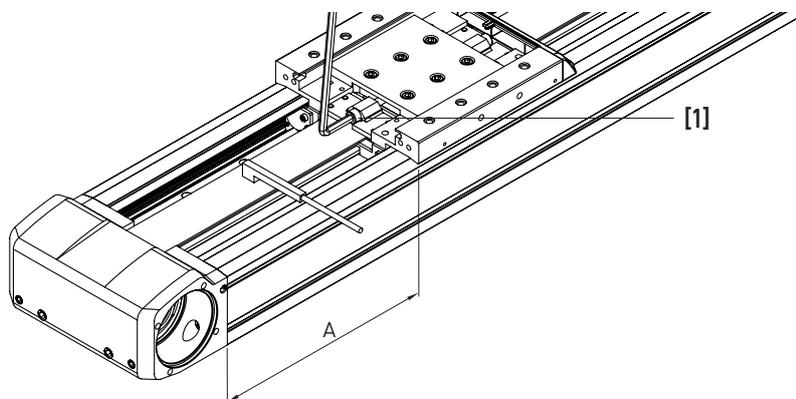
Preloading the toothed belt: linear tables HT-B without cover strip
